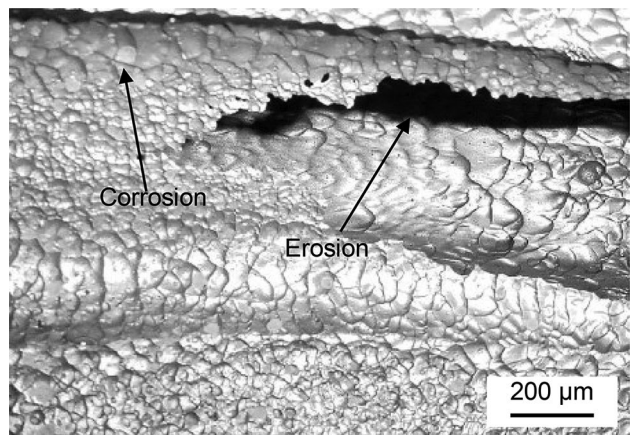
Erosion and corrosion on the welded fuel pipe [43]
